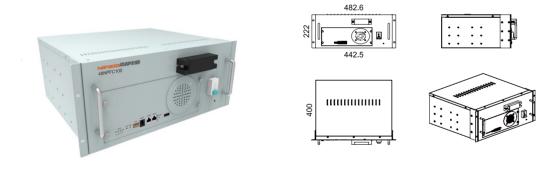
Appearance & Mechanical Drawing of 48NPFC100(19")
